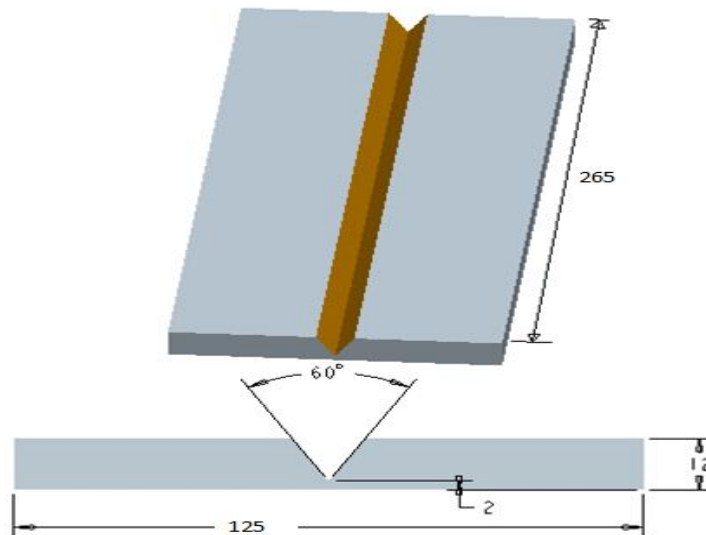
Weld Groove Geometry (All dimensions in mm)
